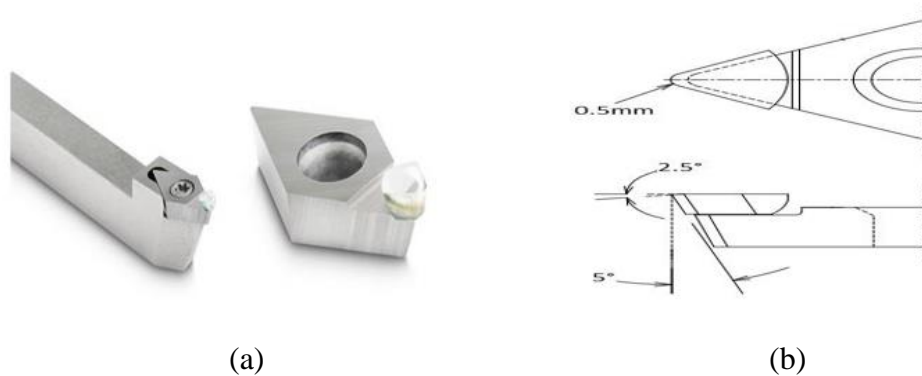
(a) Tool holder and diamond insert (b) Diamond tool dimensions.
